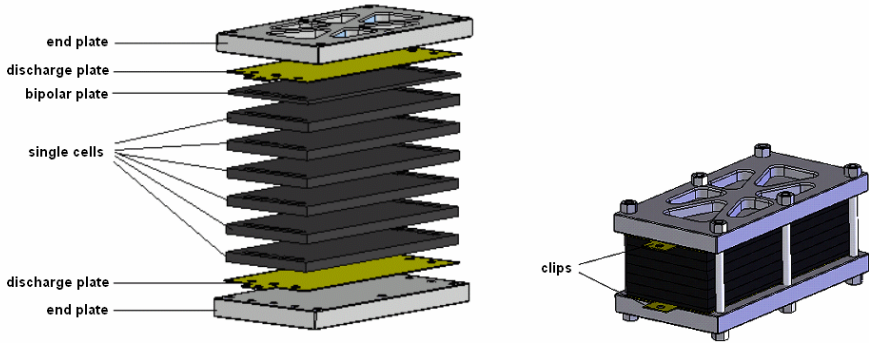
Elements of a fuel cell stack – not assembled/assembled
